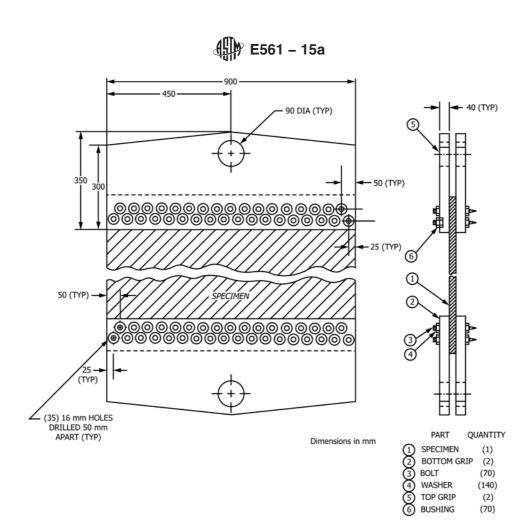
Middle-Cracked Tension (M(T)) Panel Test Setup
